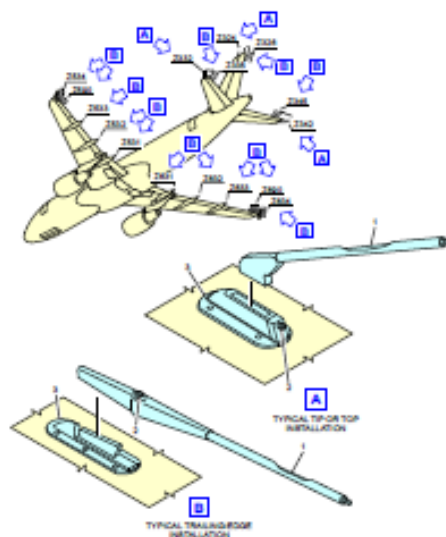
D (SHEET 1) - Static Discharger - Location and Detail
